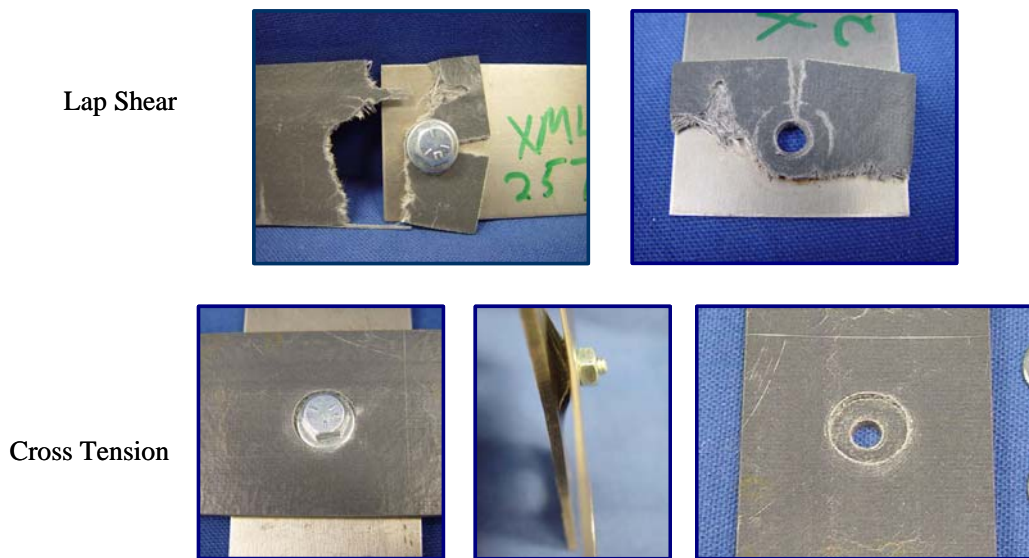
Typical fatigue failure mode: damage initiated from washer edge
